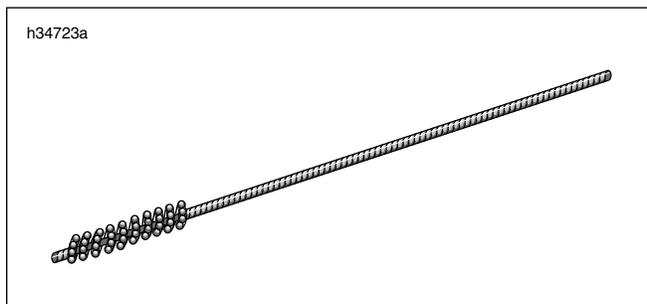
Valve Guide Hone (Part No. HD-34723)
